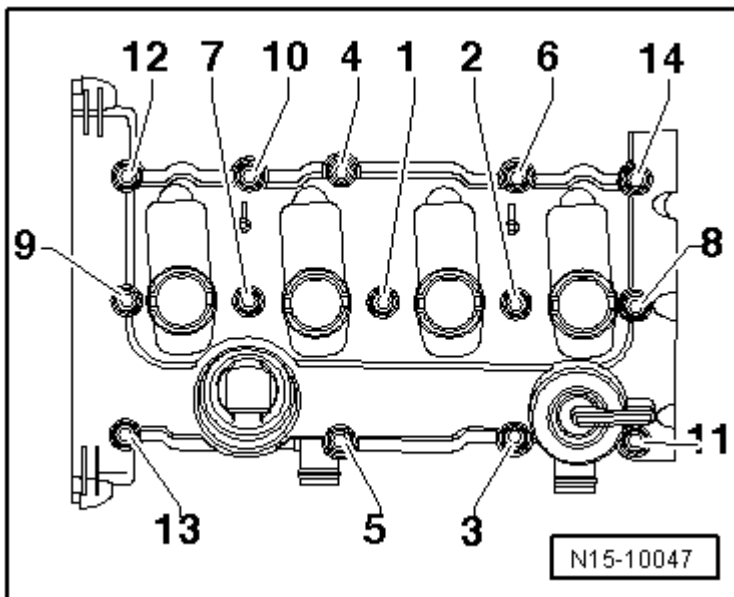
Identifying Cylinder Head Cover Bolts Tightening Sequence
